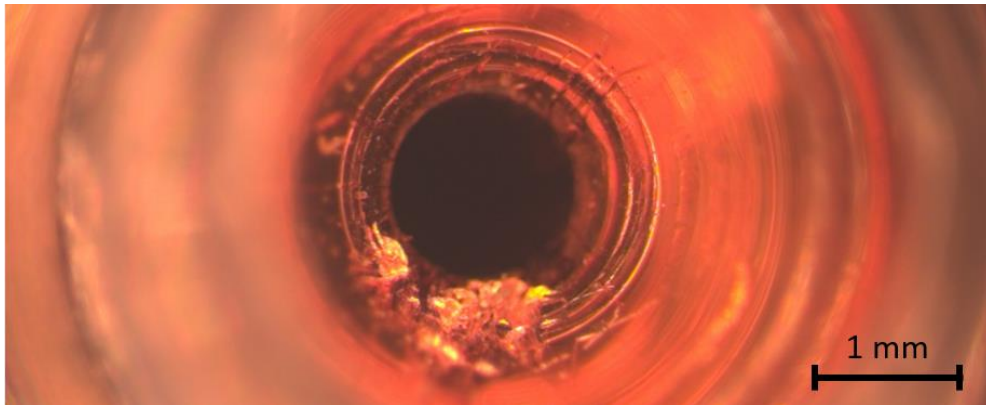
View into the welding nozzle: Burr formation in the welding nozzle tip after 60 changes
